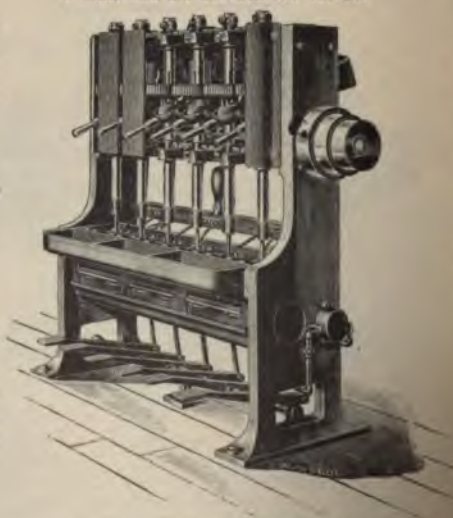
SHOWS SIX SPINDLE MACHINE.
